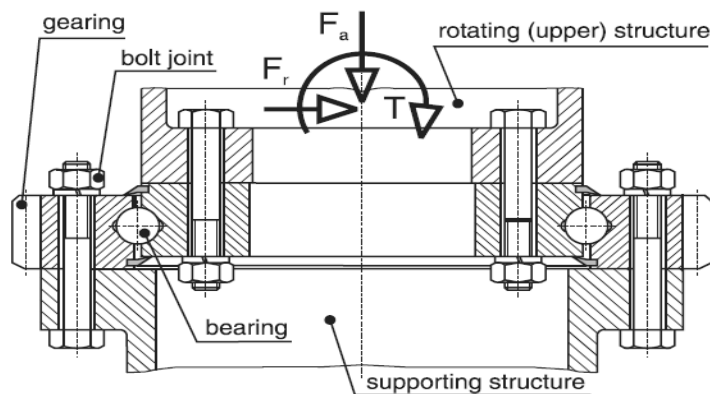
Elements of a rotational connection with a single row four contact ball bearing
